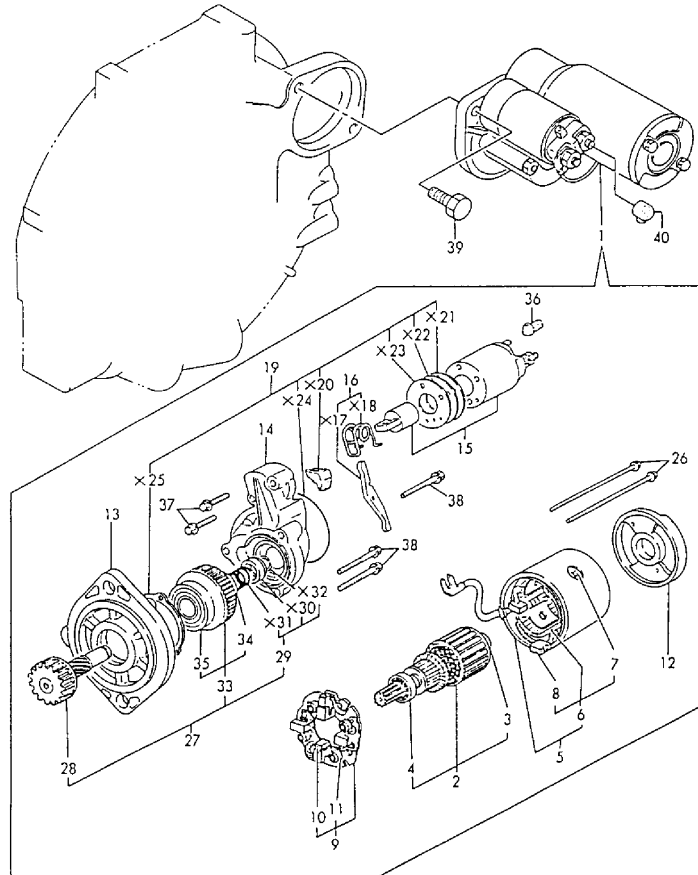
STARTING MOTOR(COMPONENT PARTS)
